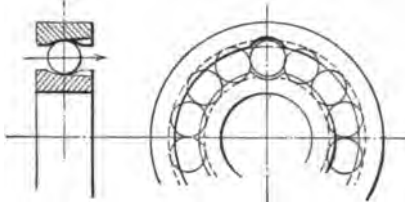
Objectionable Filling Groove in Ball Bearing.
